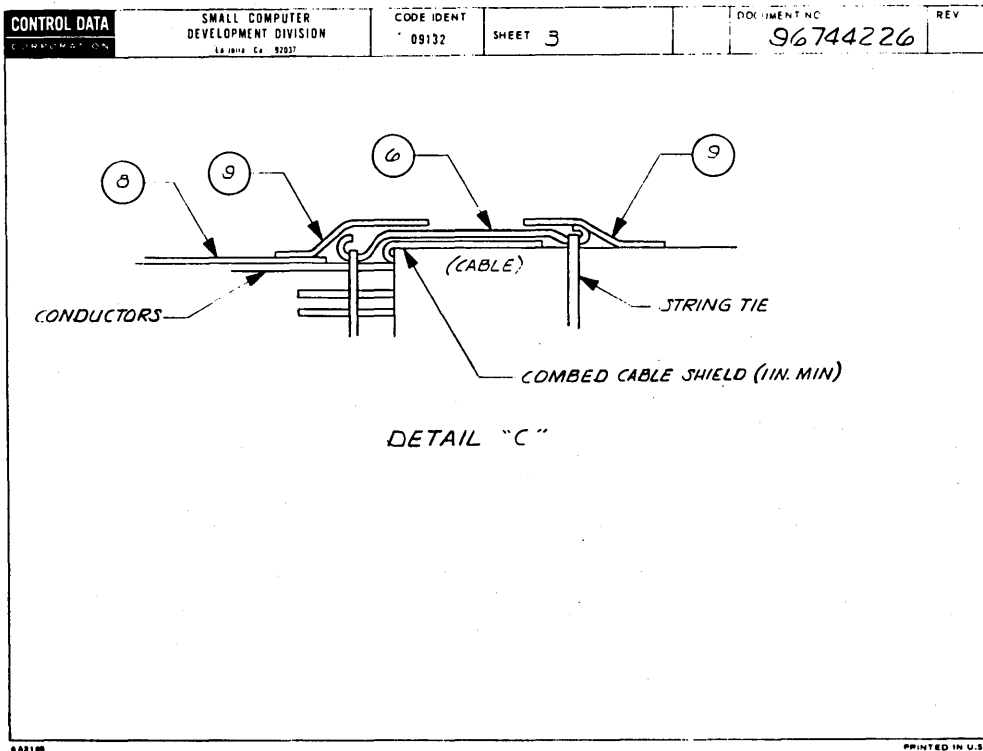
Cable Assembly - Bus In Expansion (Sheet 1 of 4)
